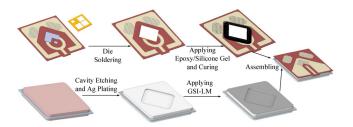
Fabrication process of the GaInAg-LM FPCB/AMB hybrid packaging.
